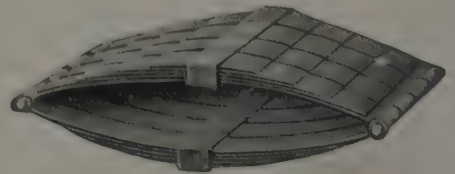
Quadruple Elliptic Spring for Passenger Car Trucks. Railway Steel Spring Company.
